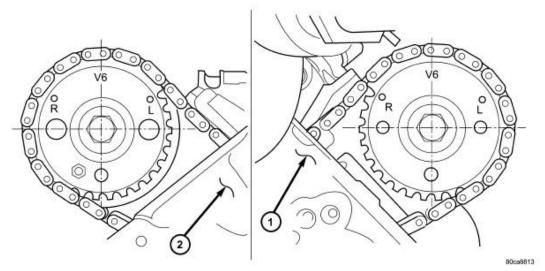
CAMSHAFT SPROCKET V6 MARKS, (#1 TDC EXHAUST STROKE) Courtesy of CHRYSLER LLC
